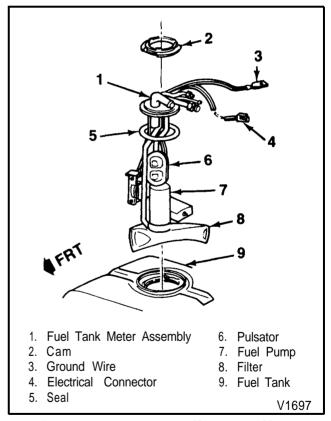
Fuel Level Meter (Sender Unit)/Fuel Pump Assembly (Typical)
